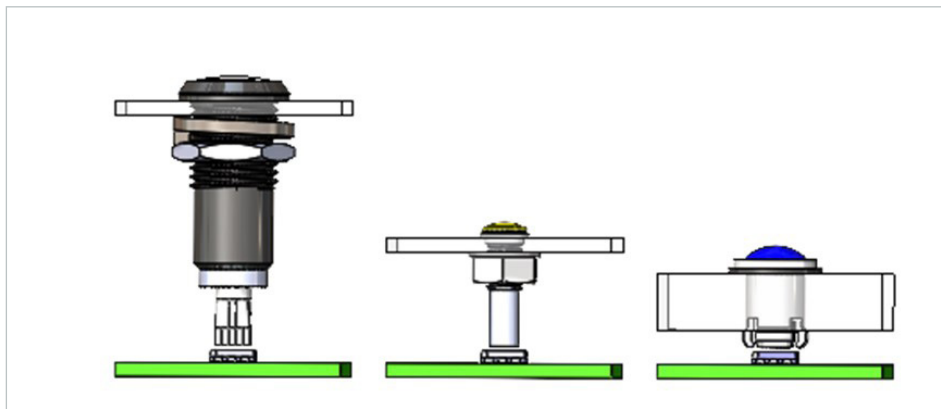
Front-mount, panel-mount light pipe options include (from right) simple friction-fit versions, threaded designs for shock and vibration resistance, or assemblies incorporating gaskets and locking washers for ingress protection.
